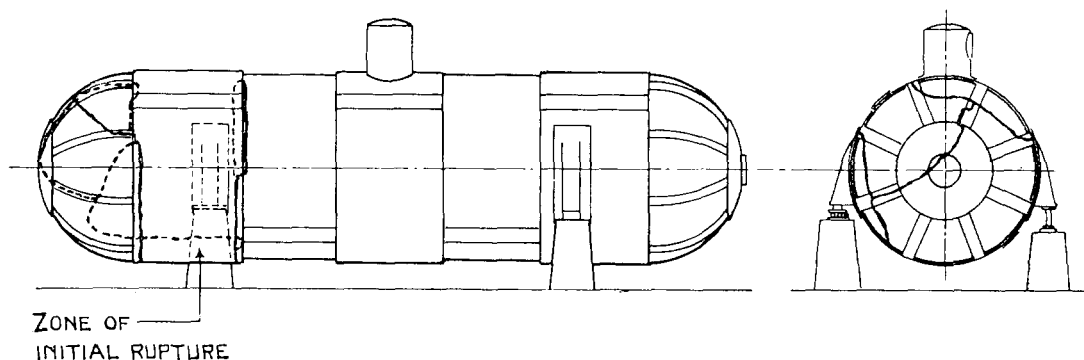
SKETCH SHOWING PATHS OF RUPTURES
